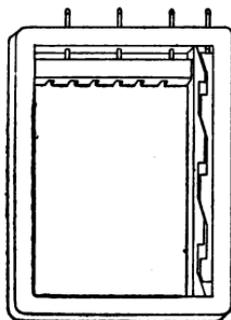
Newspaper Chase fitted with screw bolts and side wedges for quick lock-up.
